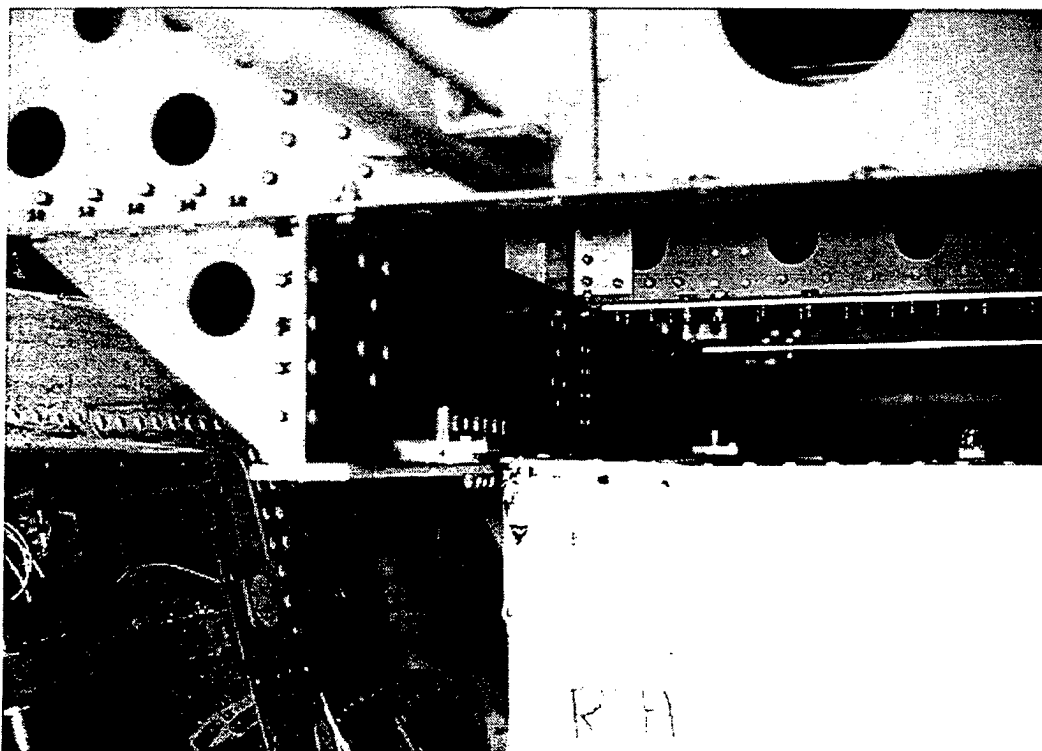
PRETEST AUXILIARY FUEL TANK RIGHT ATTACHMENT FRAMEWORK
